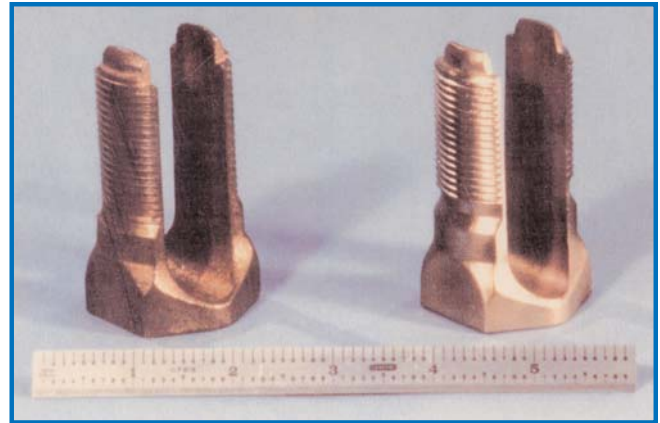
Split bolt pole line hardware. C95600 sand casting, left; SSM formed in C64200, right.
